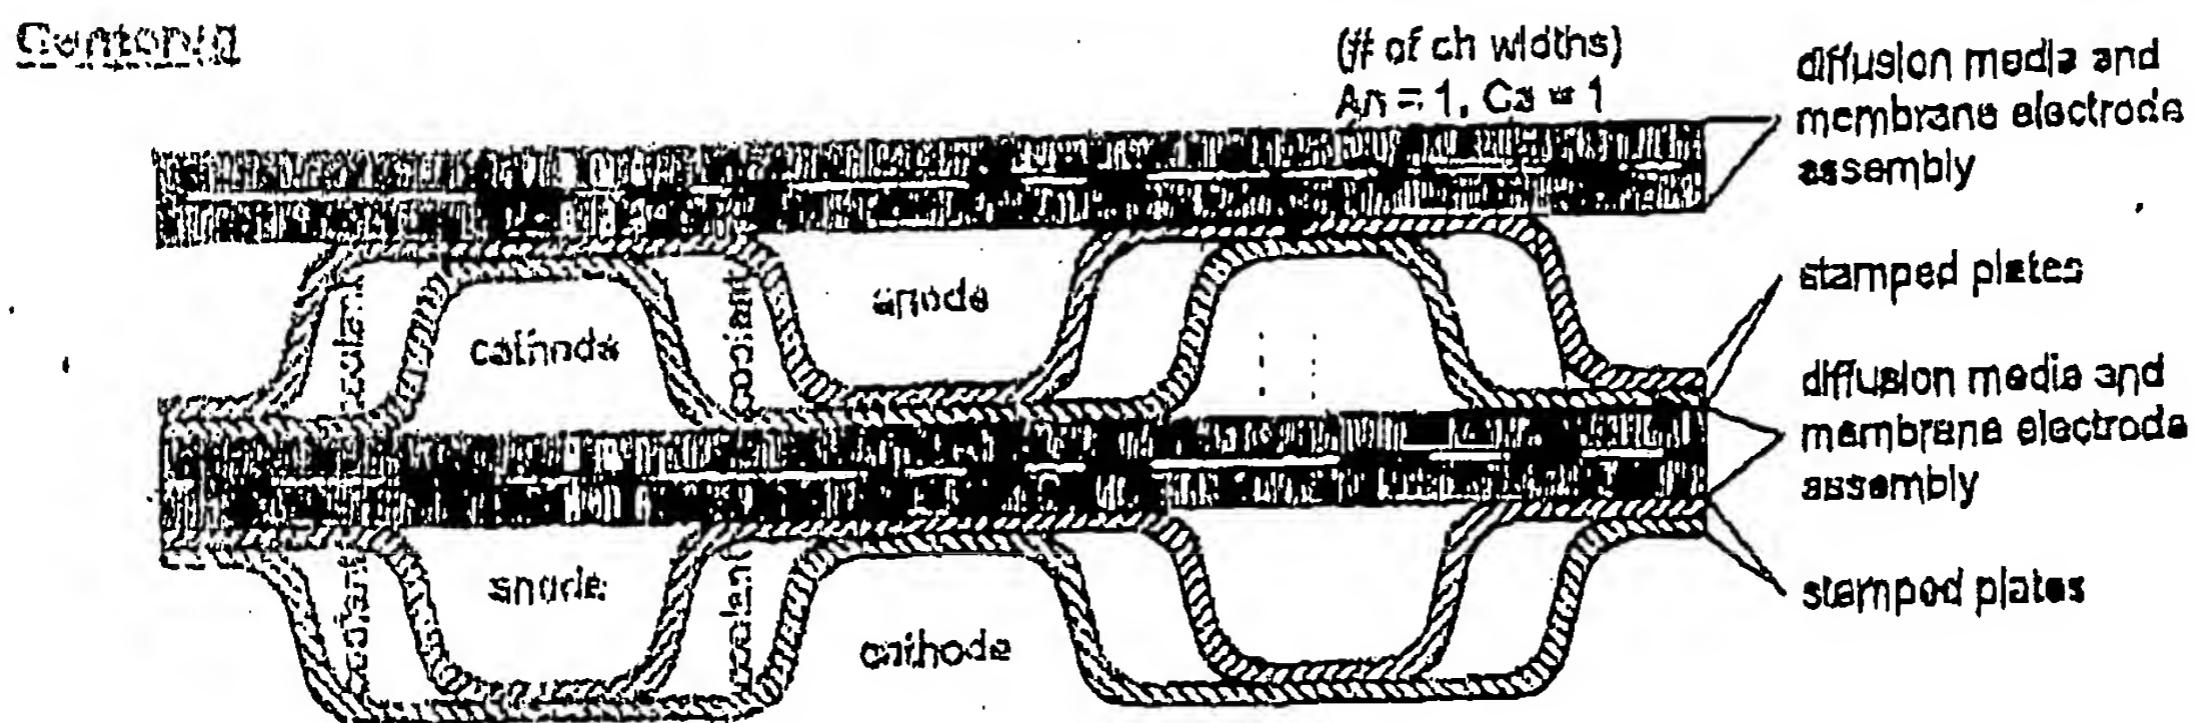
Nested Sumped Plate Cross-Section with Centered Plates
